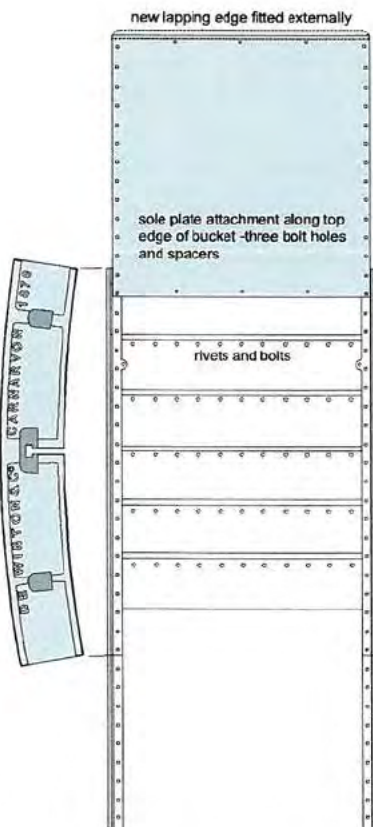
Diagrammatic plan showing location of rivetted buckets within the shroud. Non-original sole plates vary in size and are located within a recess along the internal edge of the shroud. These later replacement plates were bolted to both the shroud and particular buckets at intervals.
